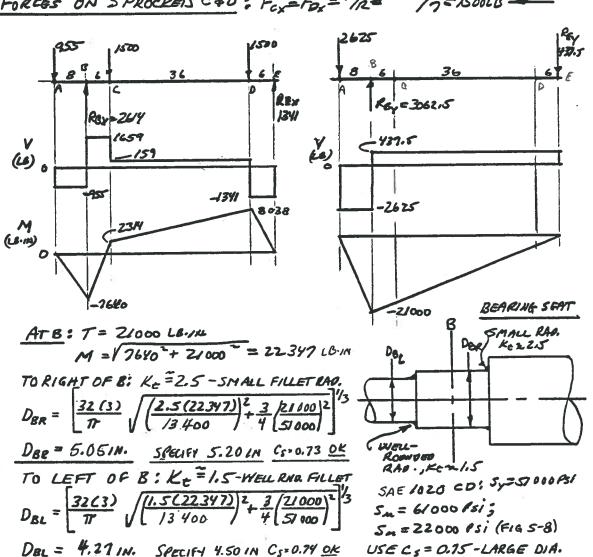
25 TORQUE ON GEAR A: TA= 63000(40)/120= 21000LB-IN ON SPROCKETS C #0; Tc=To = 63000(20)/12 =10500 LB.W TORQUE IN SHAFT: TA-C = 2/000 LB-IN; TGO= 10500 LB-IN; TOE = 0 FORCES ON GEAR A: WER = TA/RA = 21000/8 = 2625 LBY = FAY WMA = WEA ton 200 = 955 LB -== FAX FORCES ON SPROCKETS C&D: Fox=Fox= T/R= 10500/2=1500LB-
